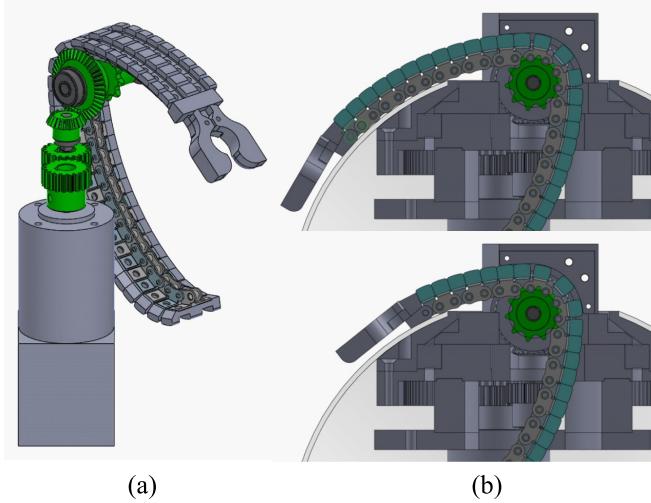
Design of the open chain actuator for polar angle motion: (a) isometric view of the actuating parts and the chain structure; (b) polar angle movement of the open chain.
